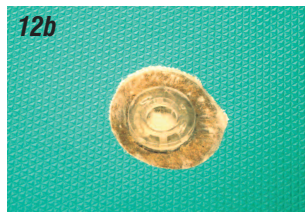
& 12b: The nylon bushings have barbed legs that hold the bushing tight to the sunvisor panel. Snap the bushings into the new 5/8" holes in the sunvisor panel.
